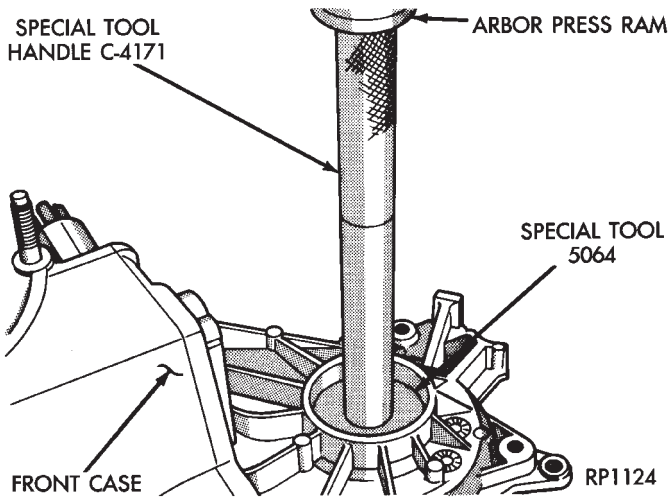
Removing/Installing Front Output Shaft Bearing Snap Ring
